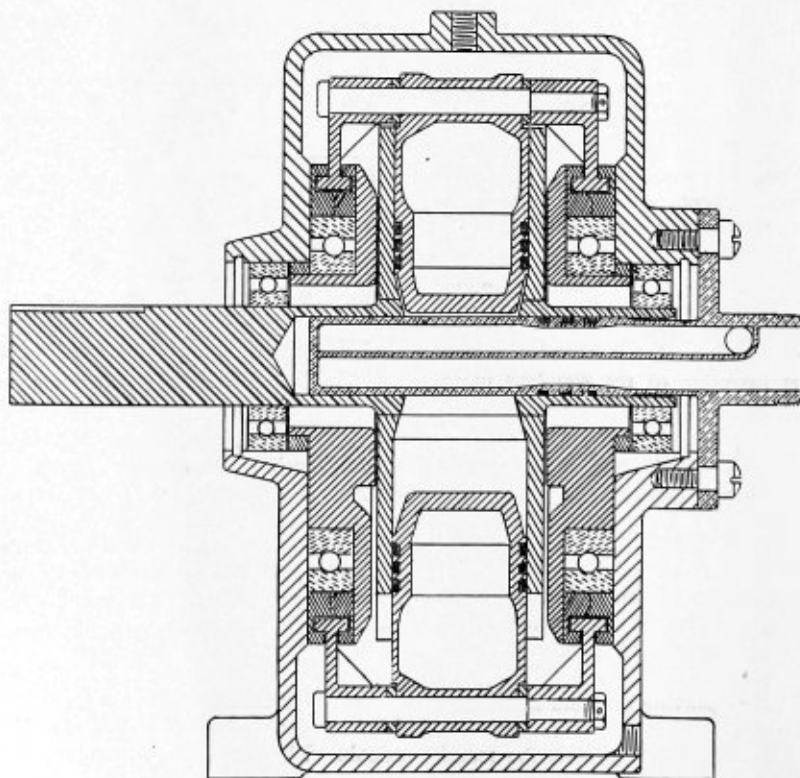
SECTIONAL VIEW OF THE COMPRESSOR.
